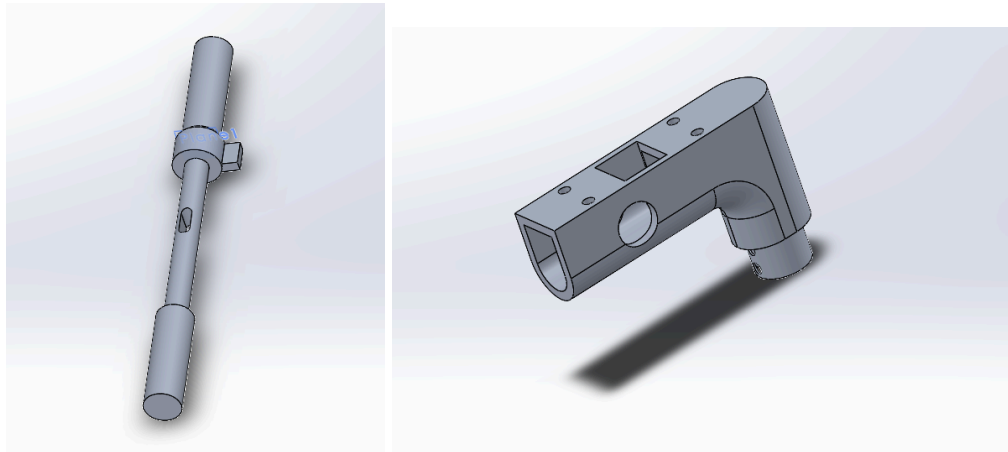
Handlebar and Handlebar Holder 3D Model
